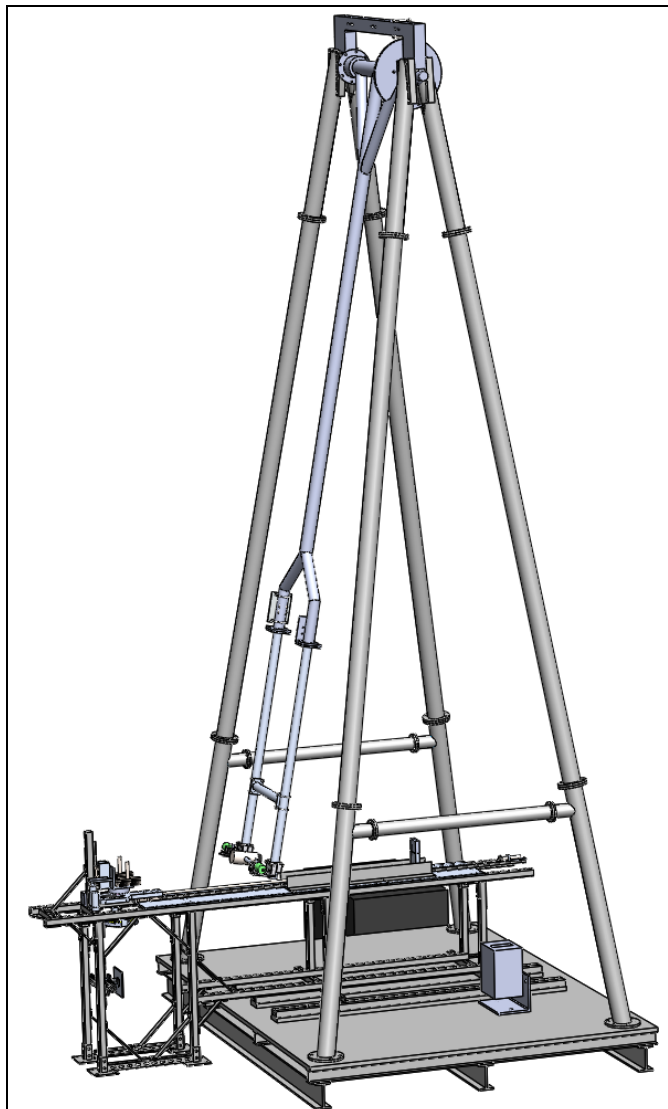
CAD angle view of Slide Test Pendulum assembly.
